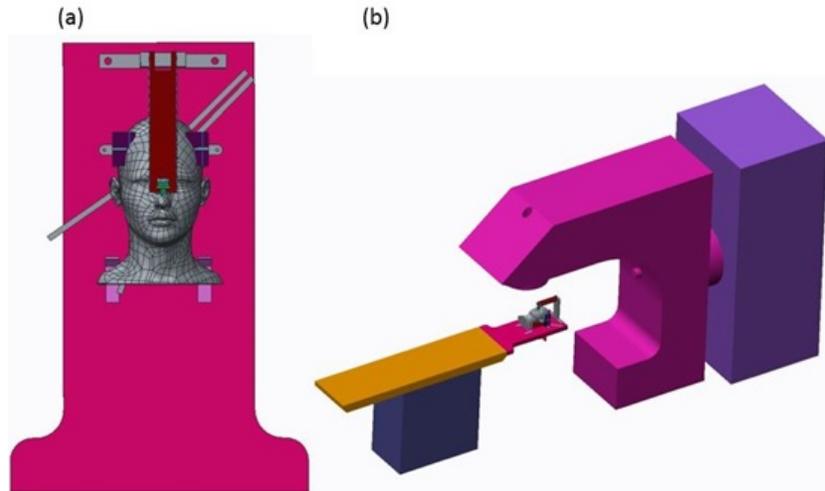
Treatment Stage Assembly (a) Head position, (b) Overall Assembly
